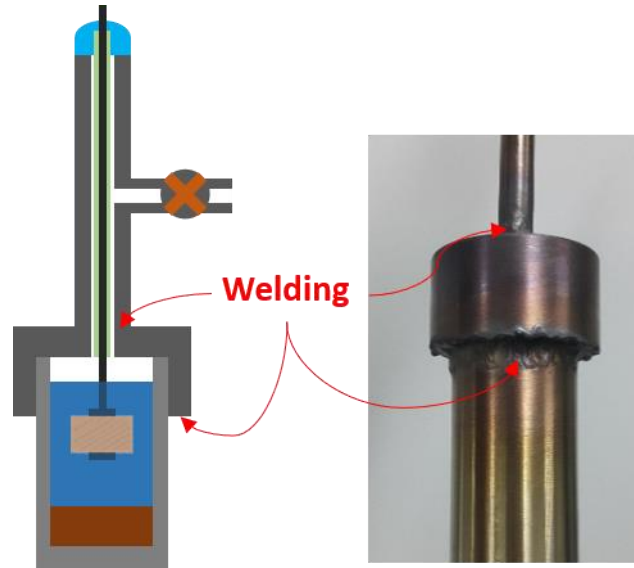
New welding design and welding part in SUS 304 cell in real experiment
